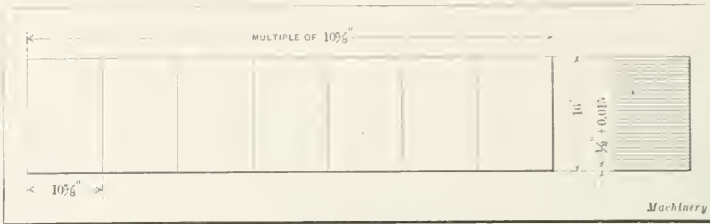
Diagram showing how Sheet Steel is cut up into Saw Blade Blanks
